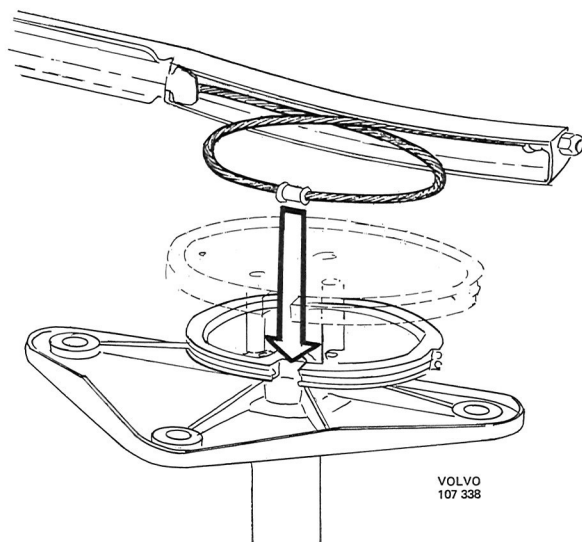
Installing cable for parallel drive link, right-hand side
